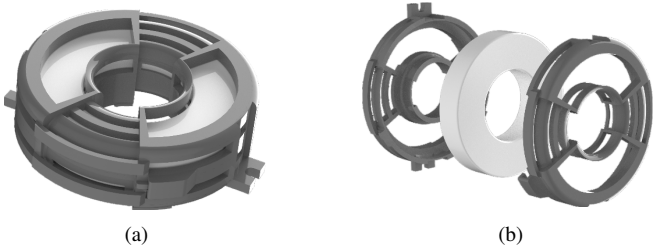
(a) An assembled view and (b) an exploded view of the customized transformer bobbin with the magnetic core.
